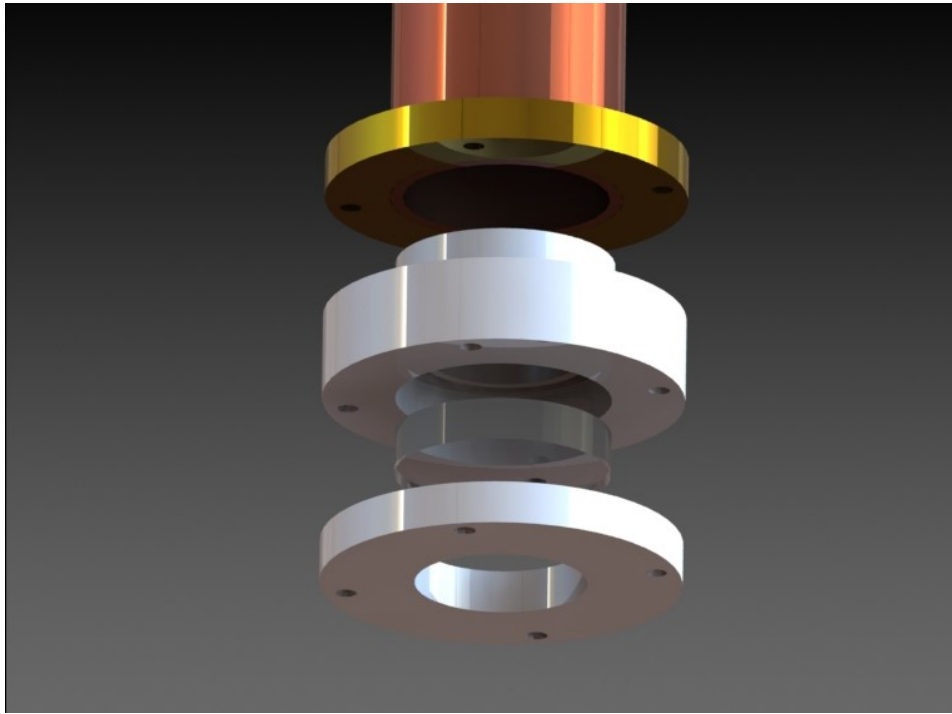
Exploded view of the assembly that seals the ends of the copper tube
